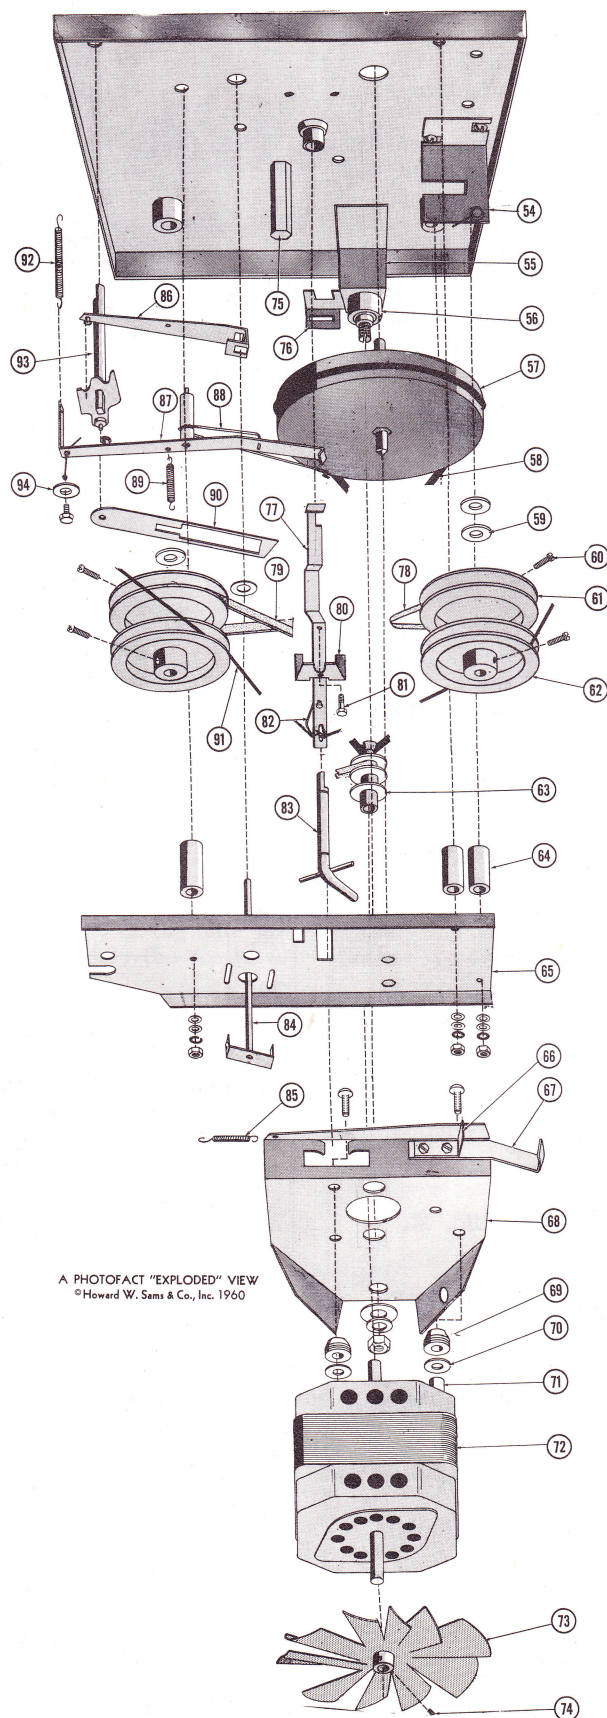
A EXPLODED VIEW OF PARTS ABOVE BASEPLATE
